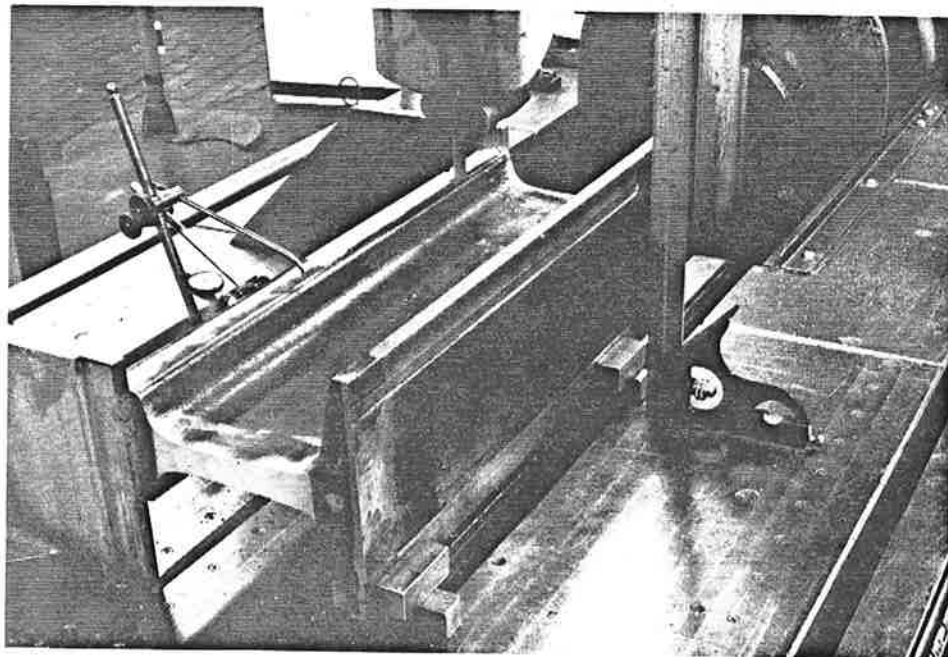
INITIAL RAIL HEAD REMOVAL AS PART OF MEIER ROD SLICING
